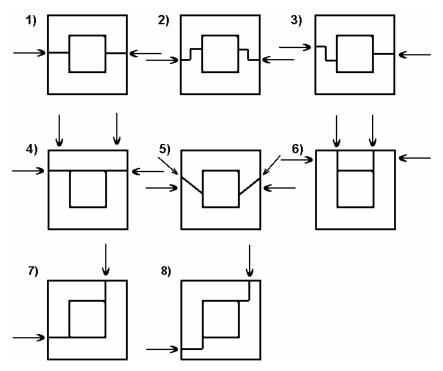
Different chamber profiles. Arrows denote possible welding directions.
